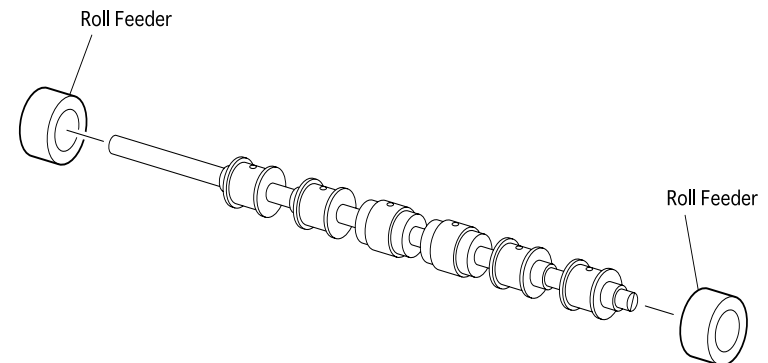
Roll Feeder: Roll Feed1 Removal
